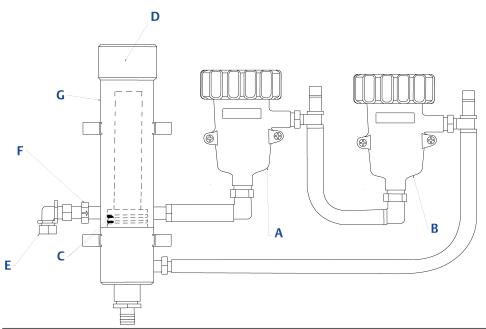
FCL-02 constant head flow controller assembly replacement parts
